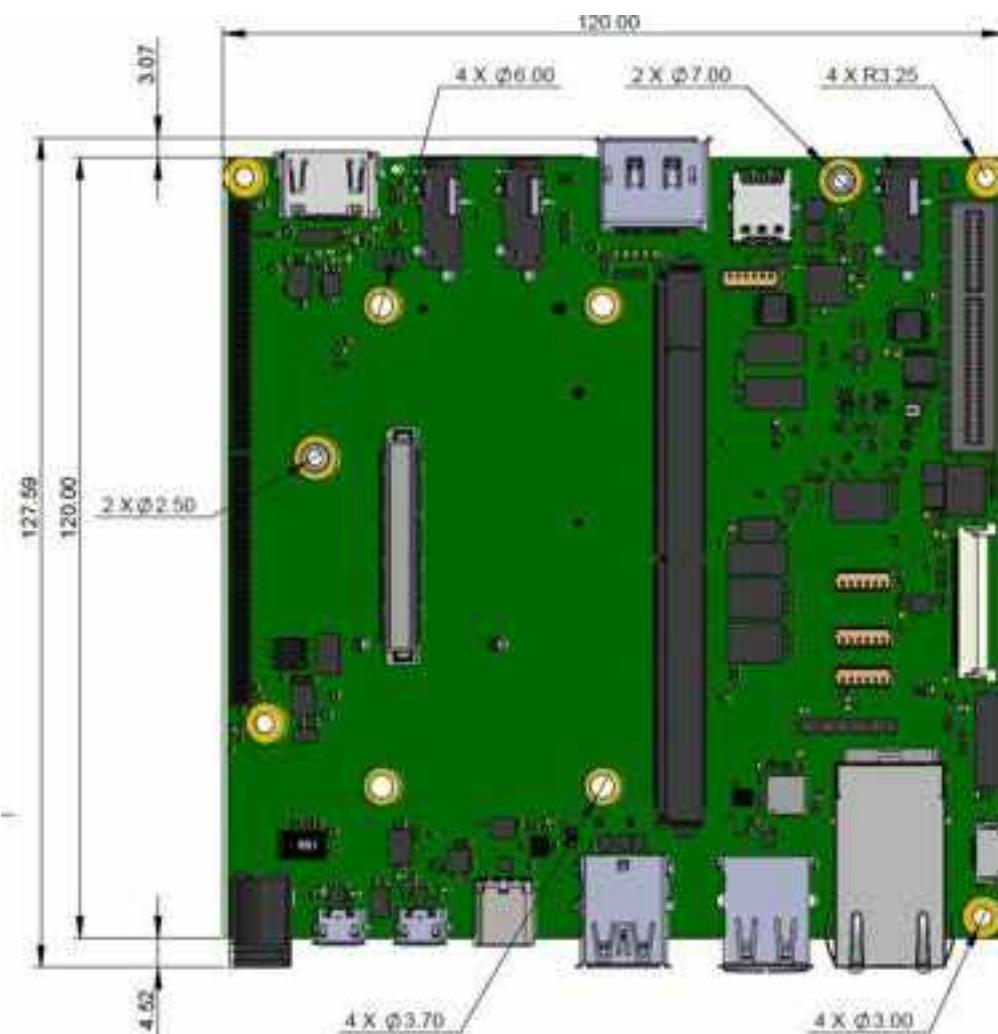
Mechanical dimension of i.MX 8M Plus Q/QL/D SMARC Carrier Board- Top View
